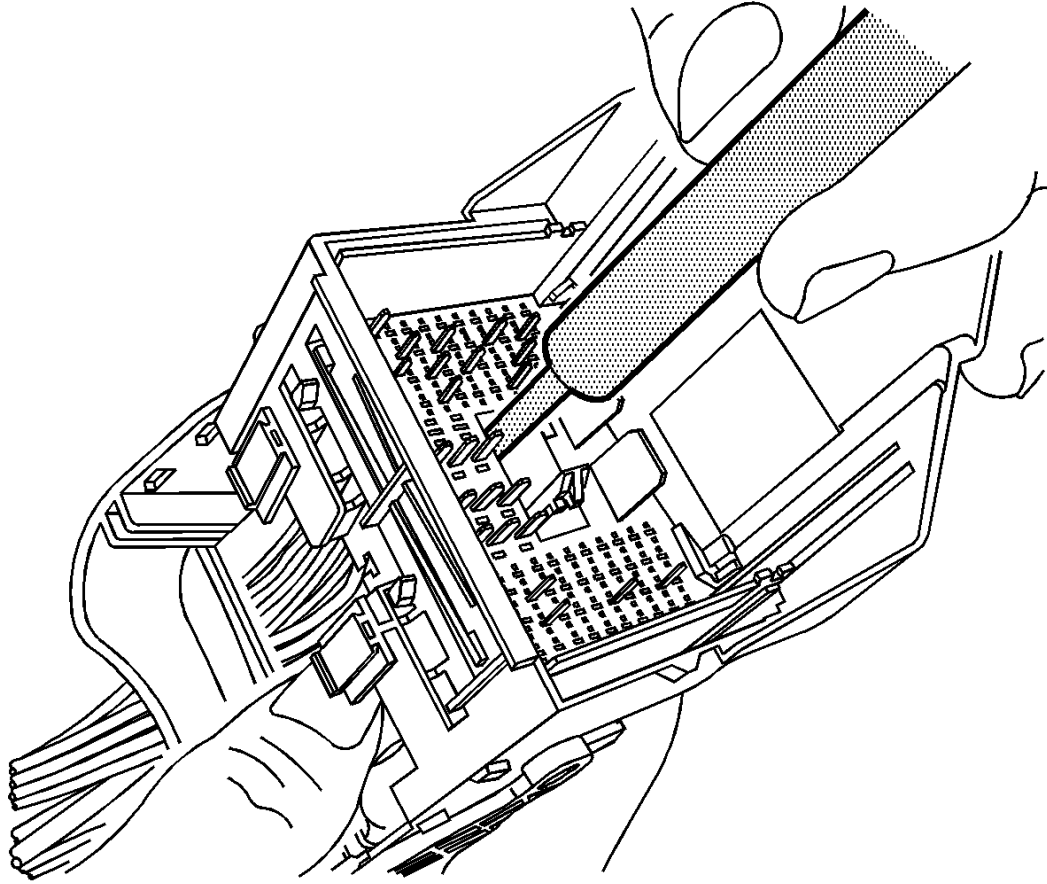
View of Pressing Prongs On Each Side Of Terminal
